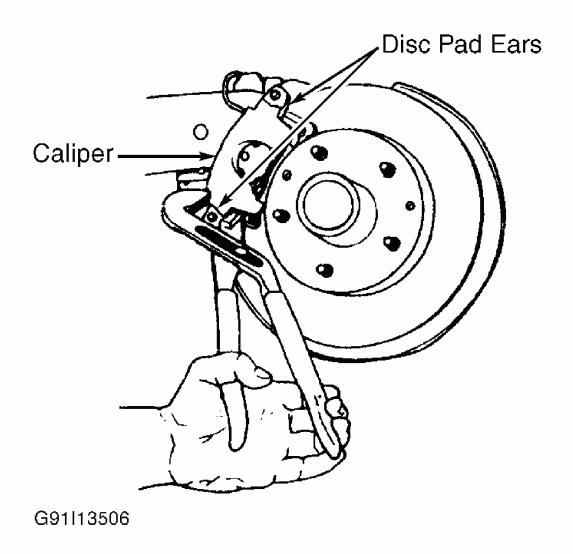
Bending Outer Pad Ears Toward Caliper Courtesy of GENERAL MOTORS CORP.
